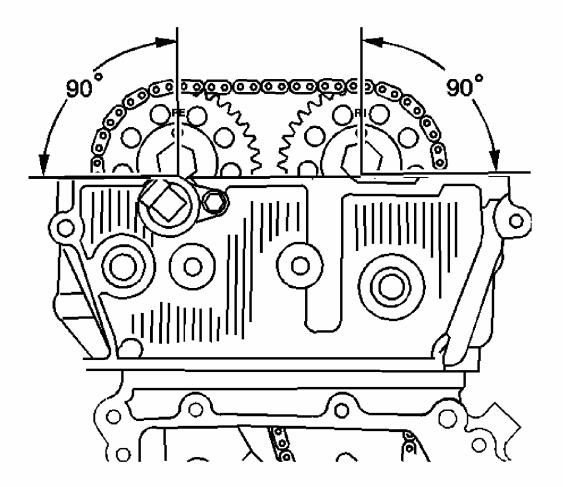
Ensuring Camshaft Sprocket Drive Pins Are At Top Of Their Rotation Courtesy of GENERAL MOTORS CORP.
